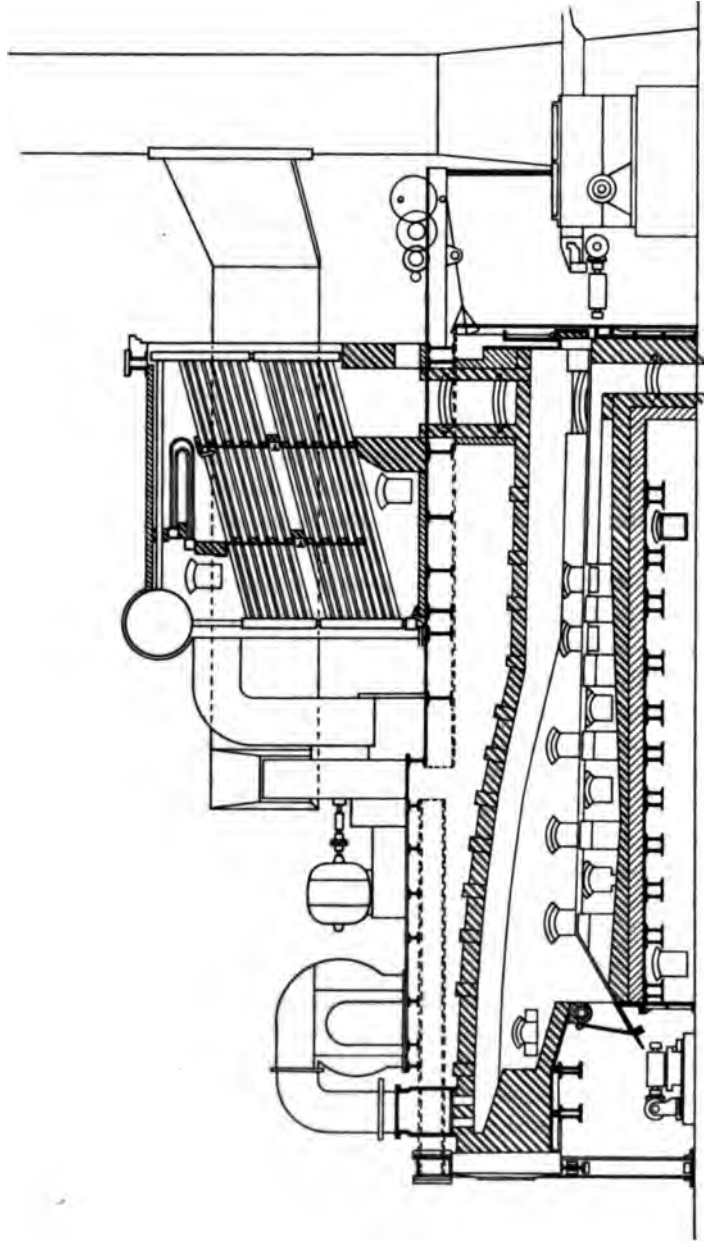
REHEATING FURNACE AND WASTE-HEAT BOILER ARRANGEMENT
